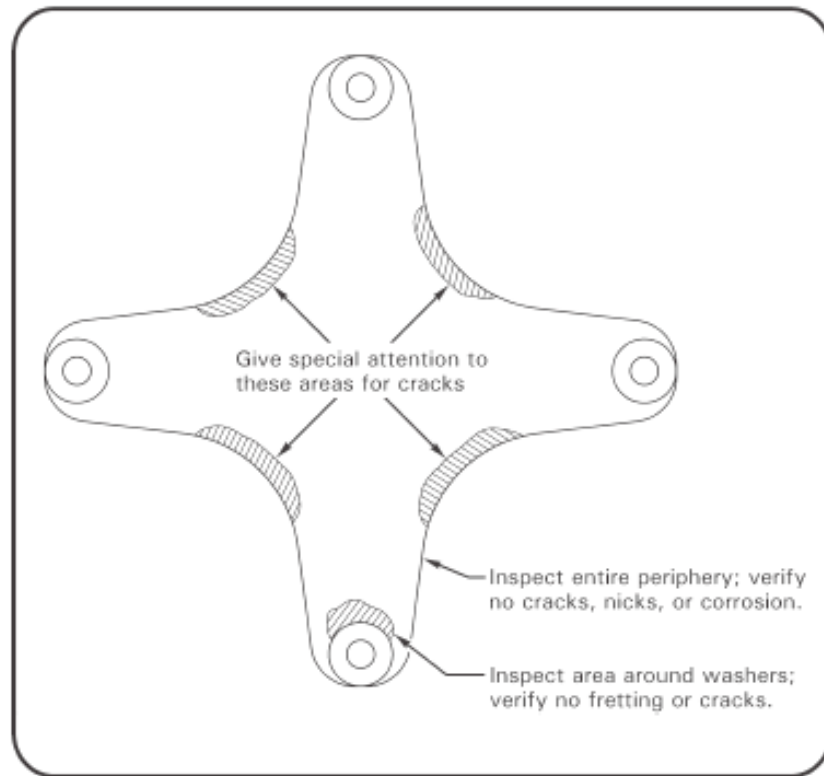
B A947-1 FLEX PLATE INSPECTION
